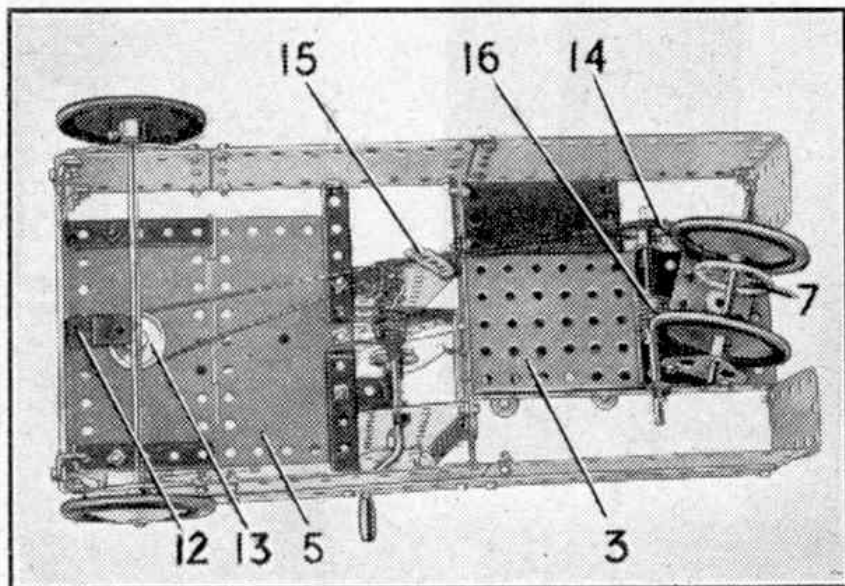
An underneath view of the crane chassis, showing how the caster unit is operated from the steering wheel.
